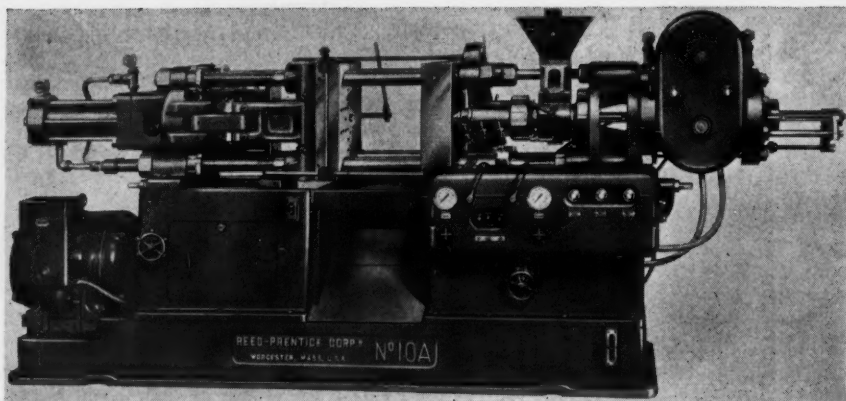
Latest design of Reed-Prentice injection molding machine, showing injection parts and controls at right and the toggle actuating mechanism for moving and locking rear half of die at left.
